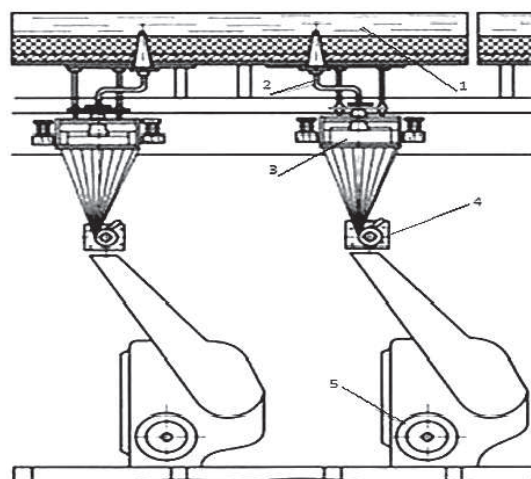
Smelting furnace: 1 – bath type furnace, 2 – feeding tube, 3 – bushing, 4 – gathering shoe, 5 – winder [13]
